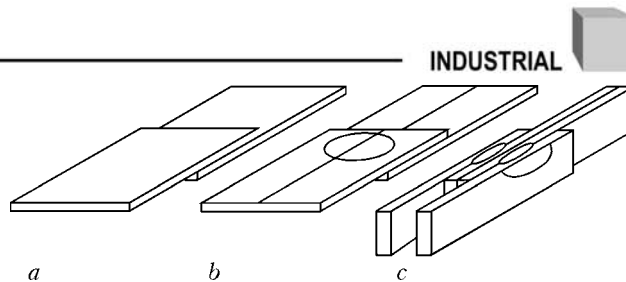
Schematic of welded sample preparation to microsection cutting out: *a* — before welding; *b* — after welding with the line of the cut along the spot weld; *c* — for microsection preparation
